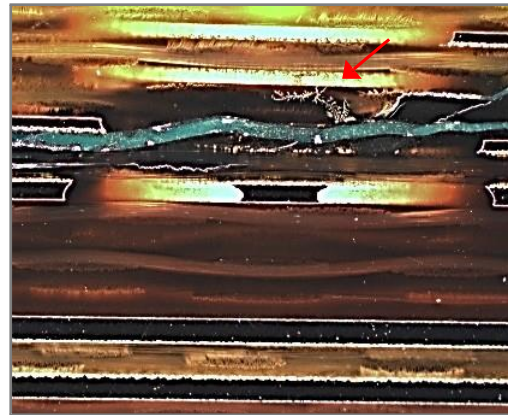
Cross section of a failed PCB showing extensive damage due to electrical overstress and a dendritic structure.
